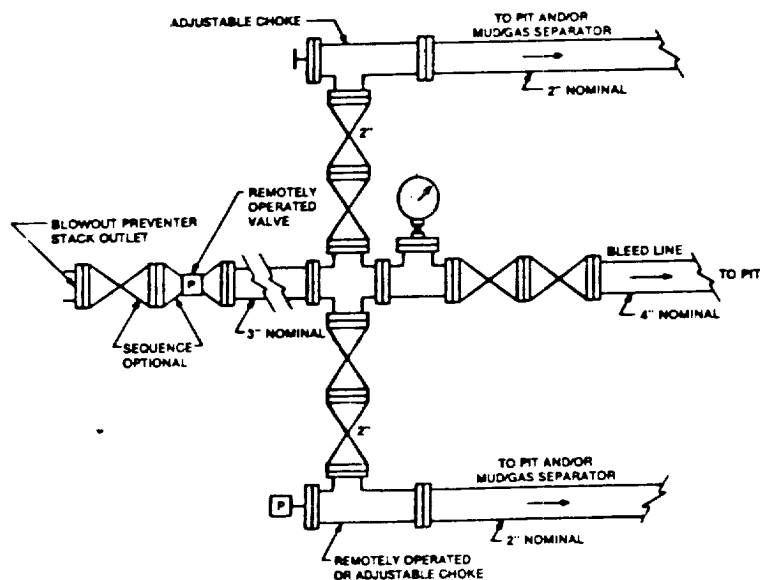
Typical choke manifold assembly for 5M rated working pressure service — surface installation.
